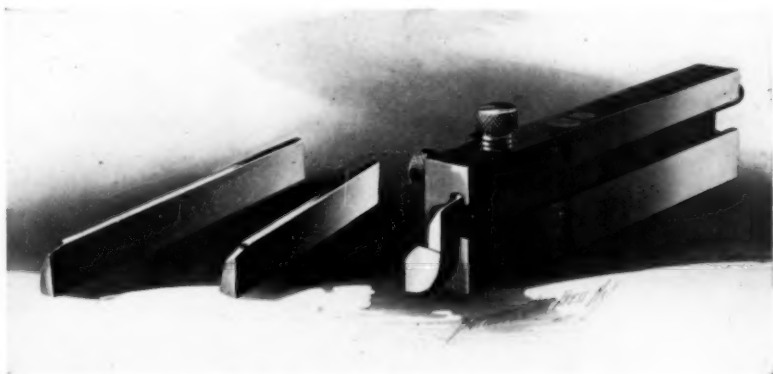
VIEW OF OTHER SIDE OF TOOL SHOWN IN FIG. 7
